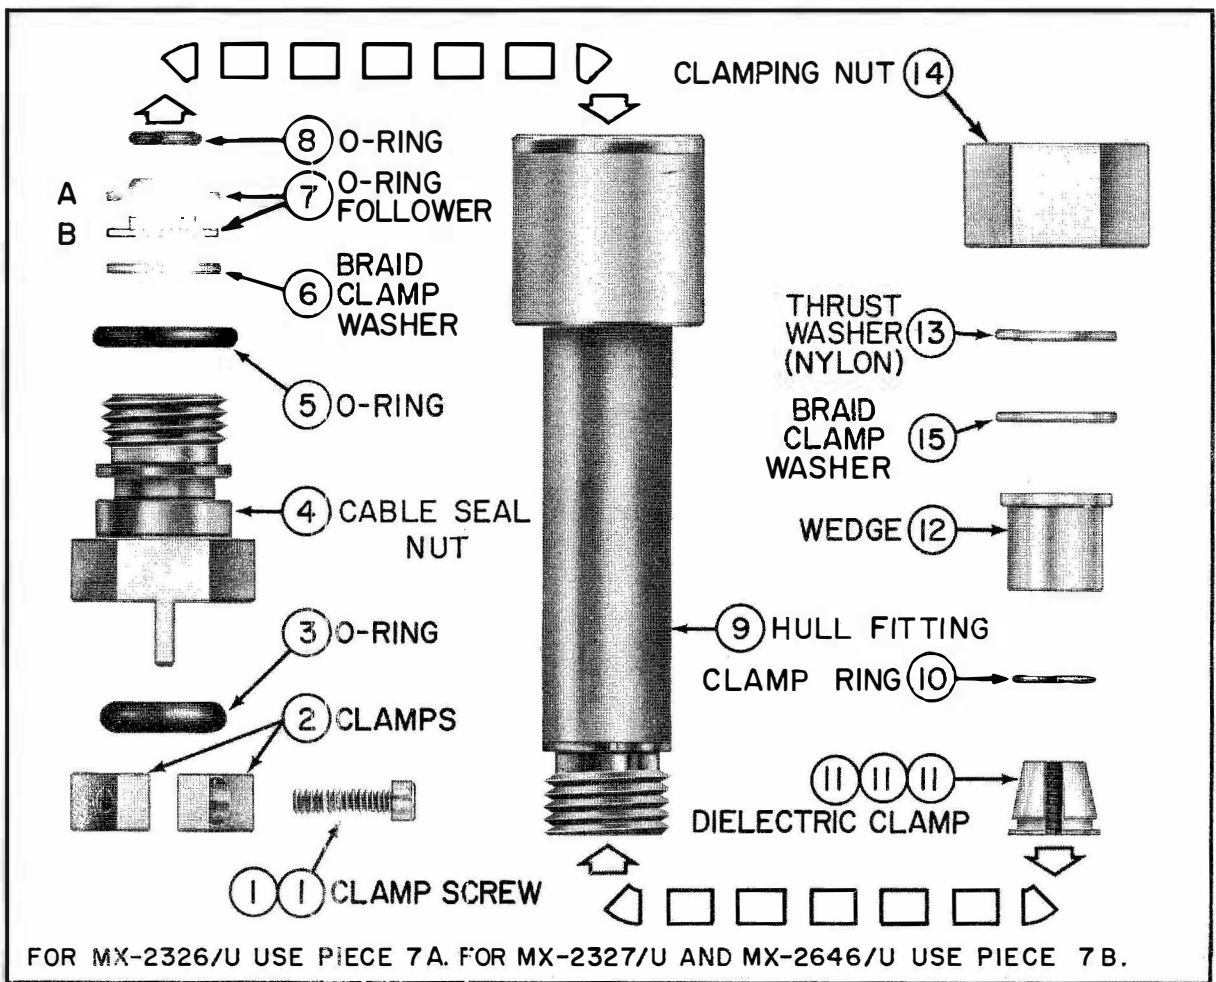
MX-2326/U, MX-2327/U & MX-2646/U Exploded
